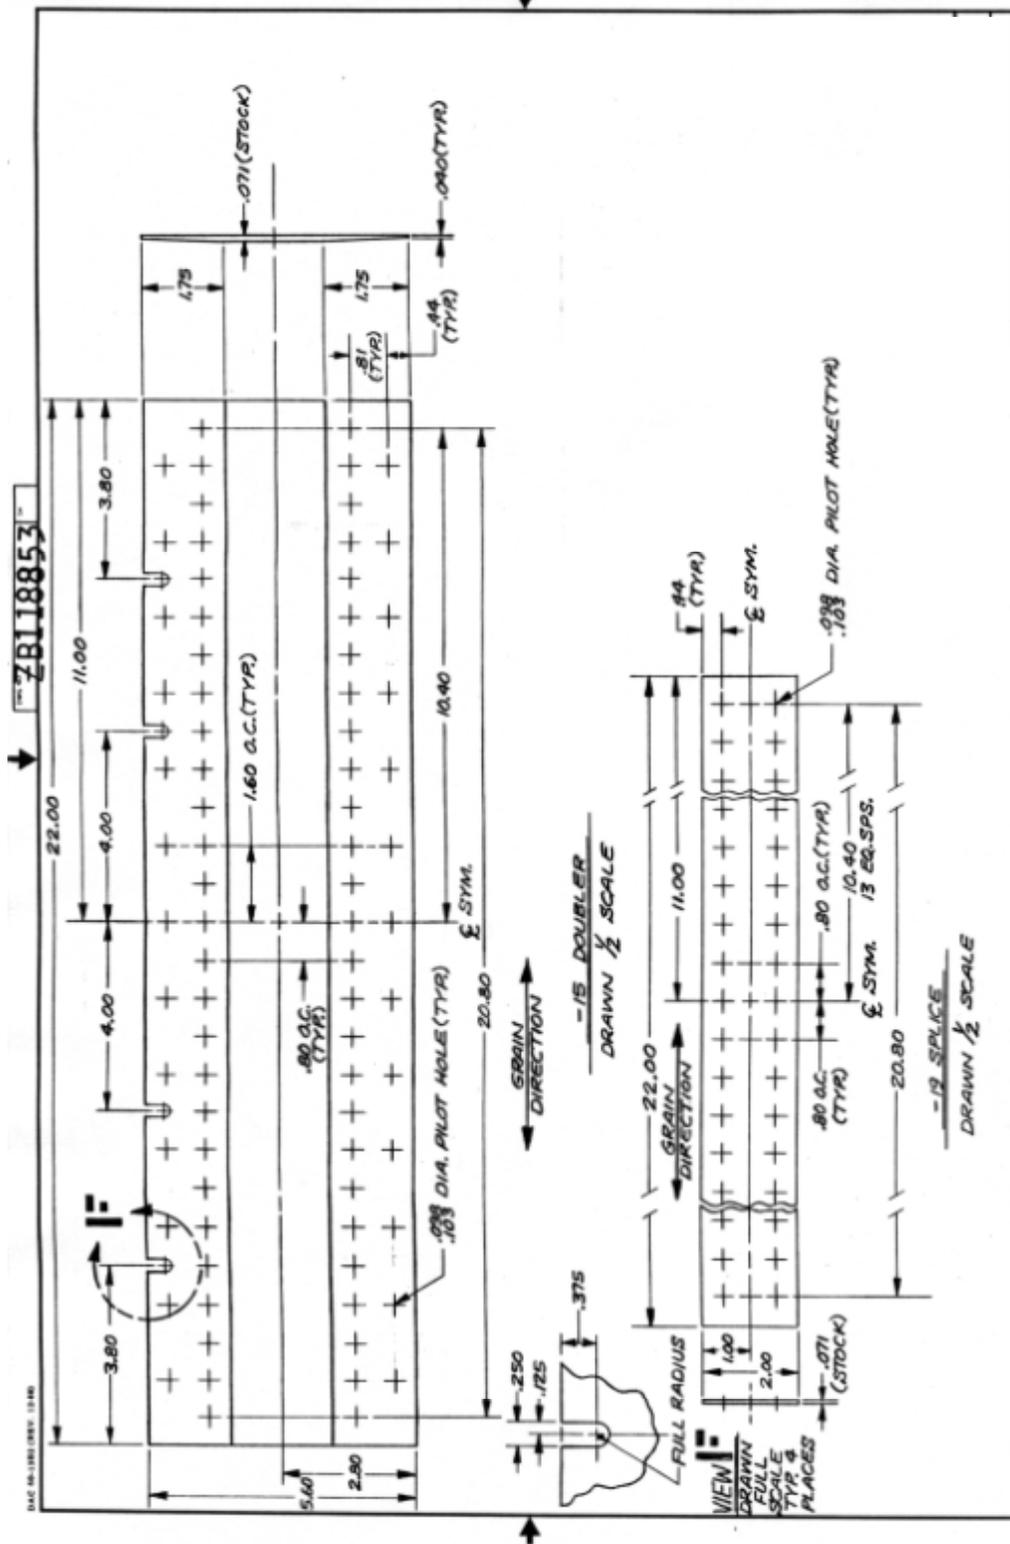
EQUIVALENT INITIAL FLAW SIZE PANEL ASSEMBLY DRAWINGS
